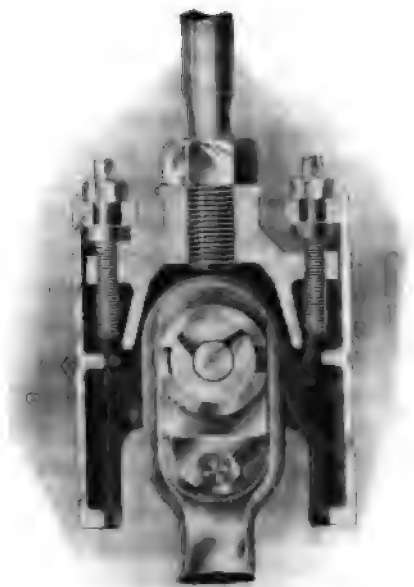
THE CROSS-HEAD OF ONE OF THE AMERICAN BLOWER COMPANY'S ENGINES
